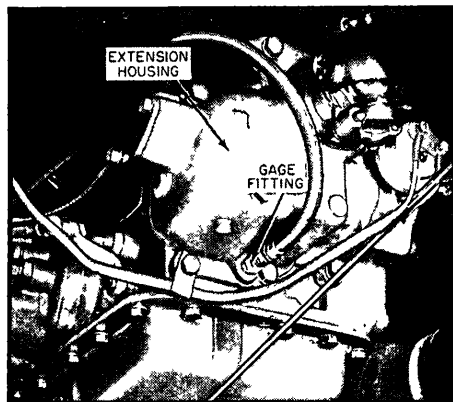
Connection for multiple disc clutch pressure test. 1950-52
